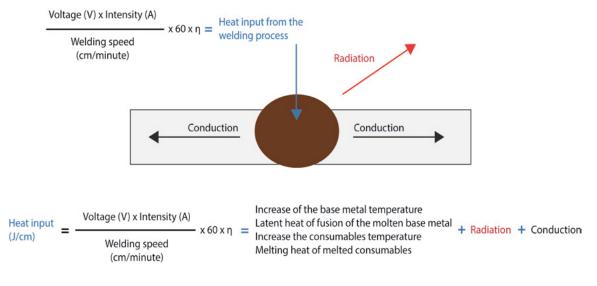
Balance of heat input with an electric arc welding process.
